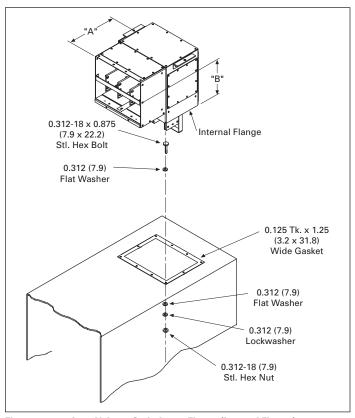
Low-Voltage Switchgear Flange (Internal Flange)
